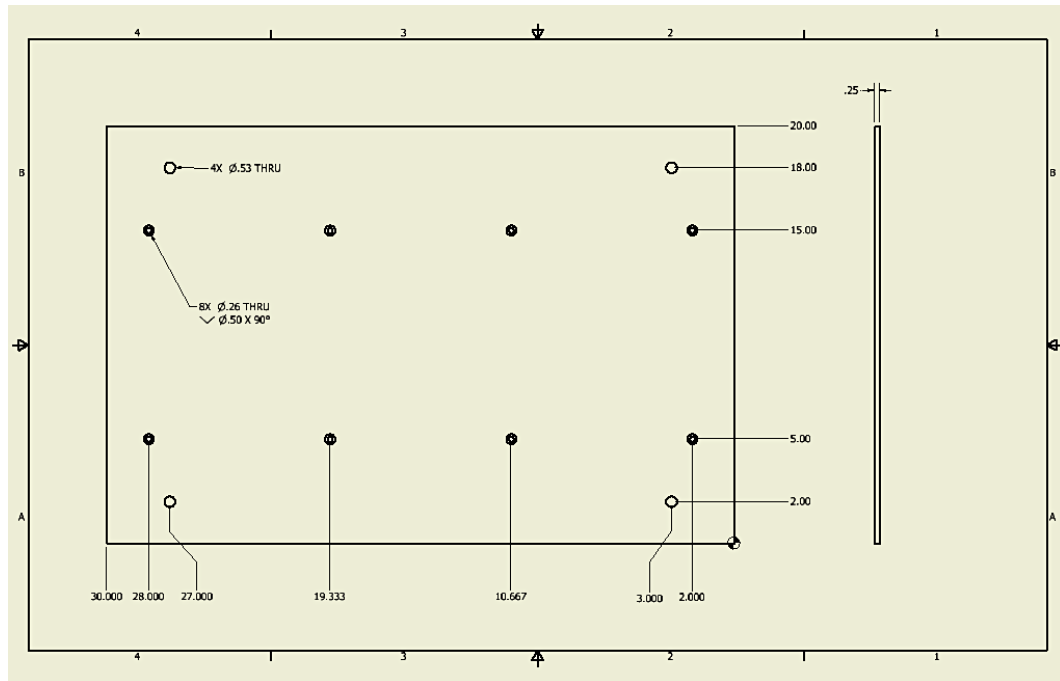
Dimensional drawing of floor mounted pressure tank plate
